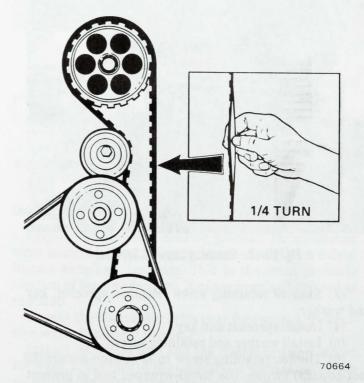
B-11 Checking Camshaft Drive Belt Tension
